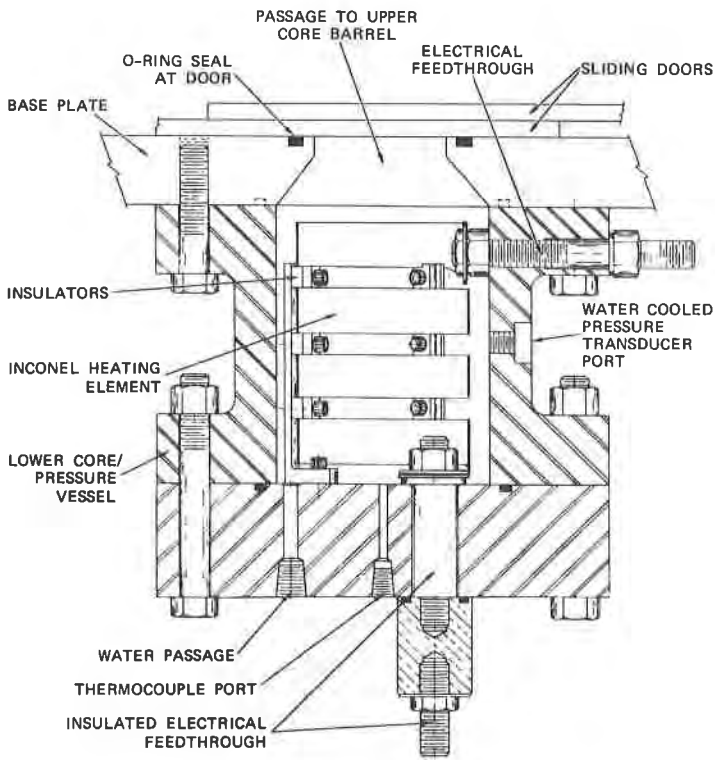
LOWER CORE HEATING ELEMENT DETAIL
